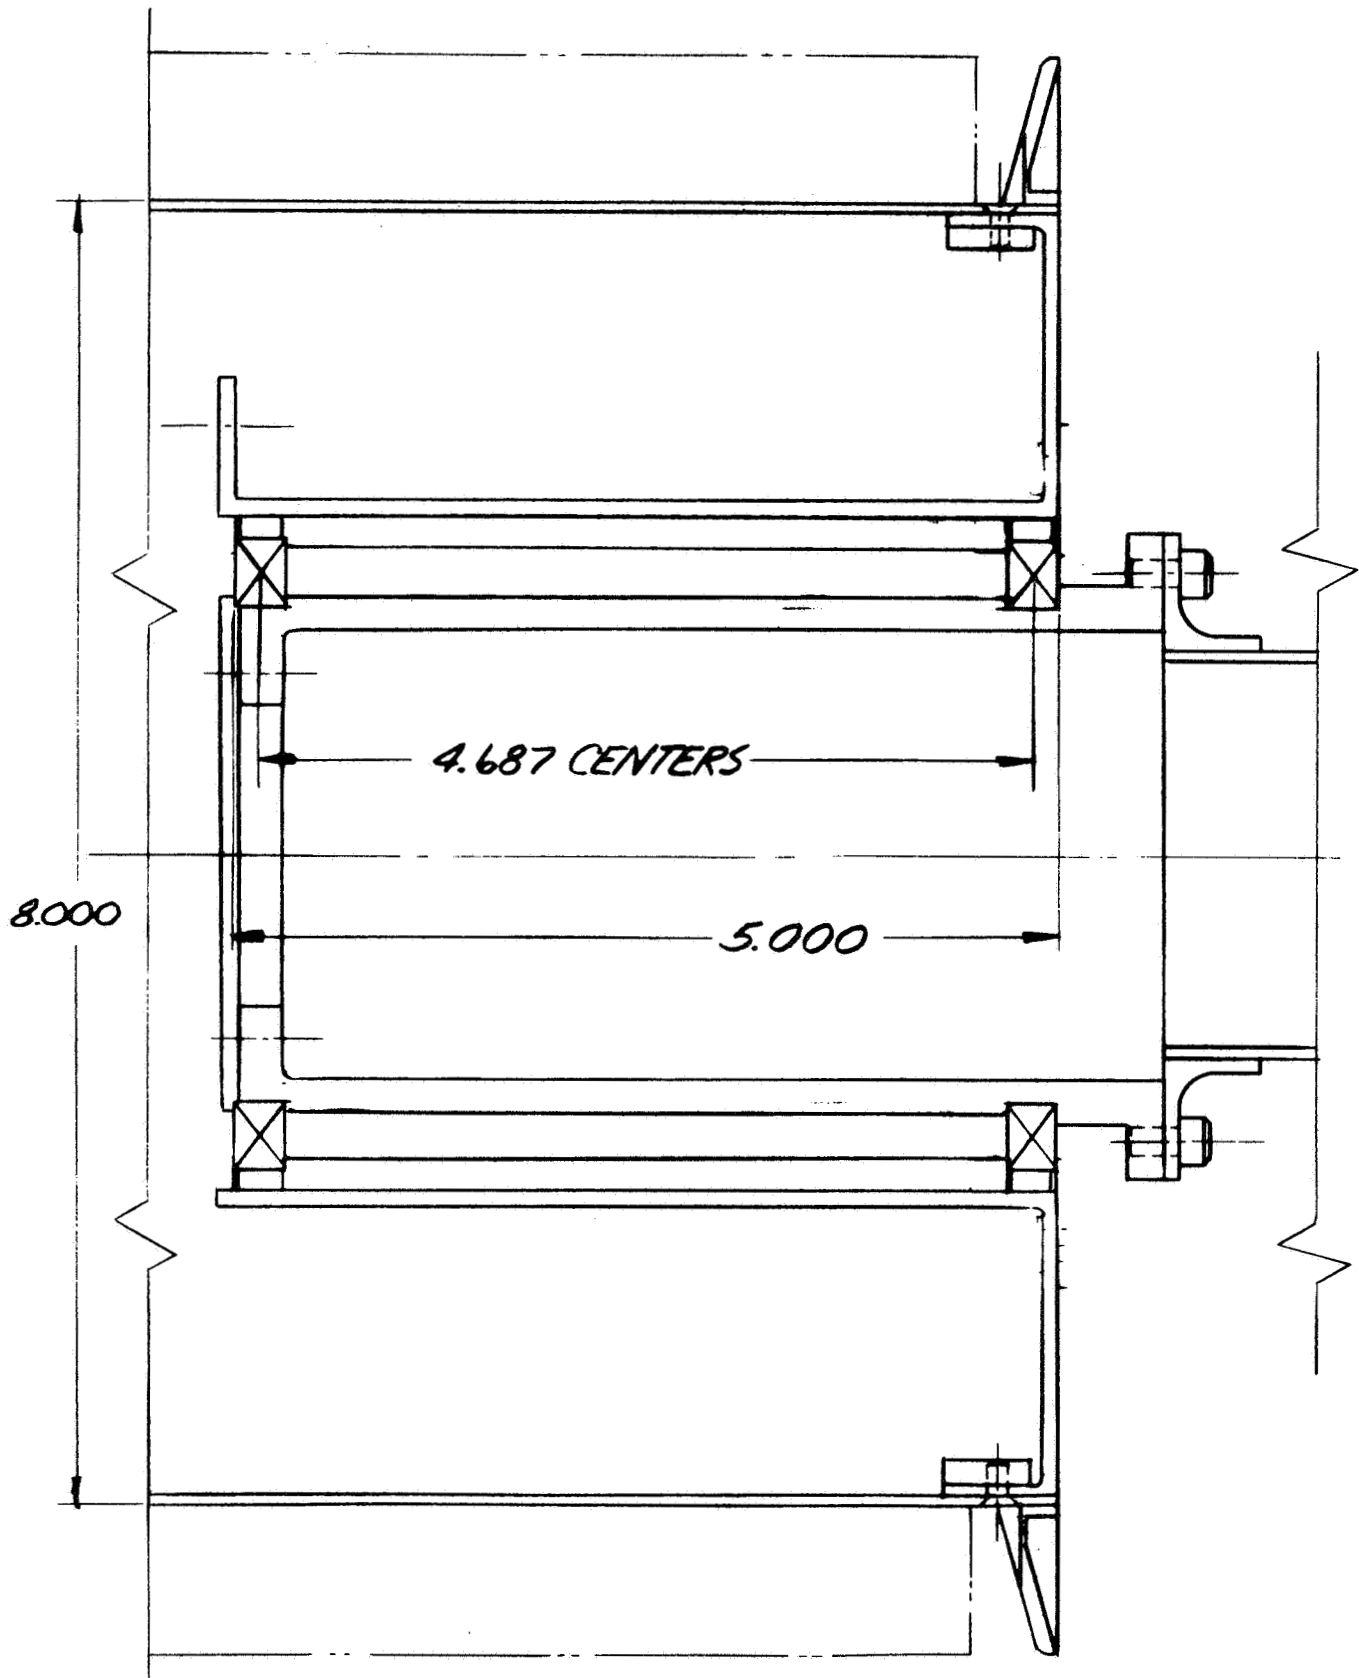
Bearing Arrangement for Inboard End Cap and Shaft
